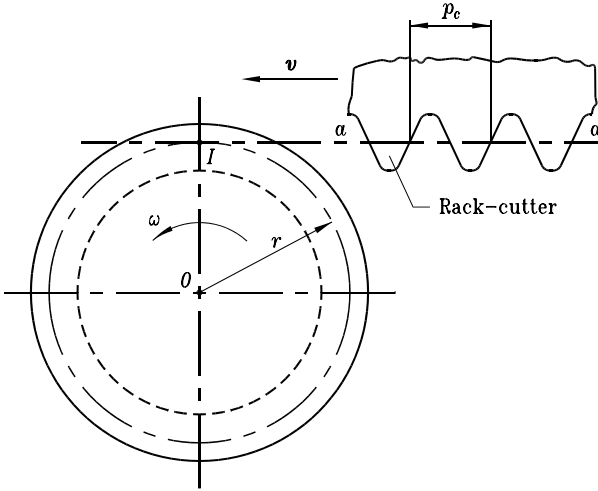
Centroides of rack-cutter and spur gear.
